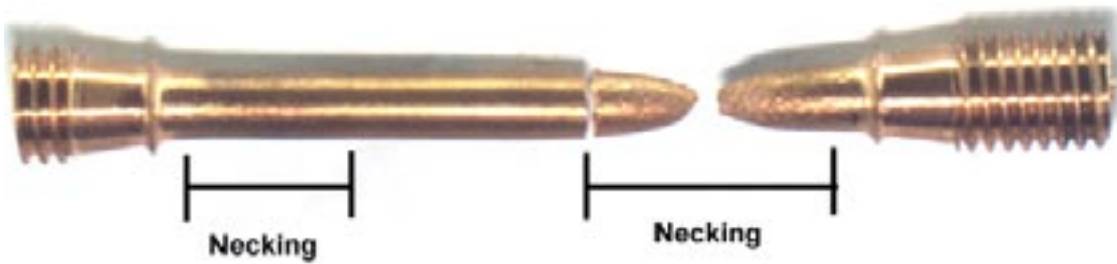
A cross weld specimen after testing. Note the two necking areas, corresponding to the heat affected zone portions of the weld.
